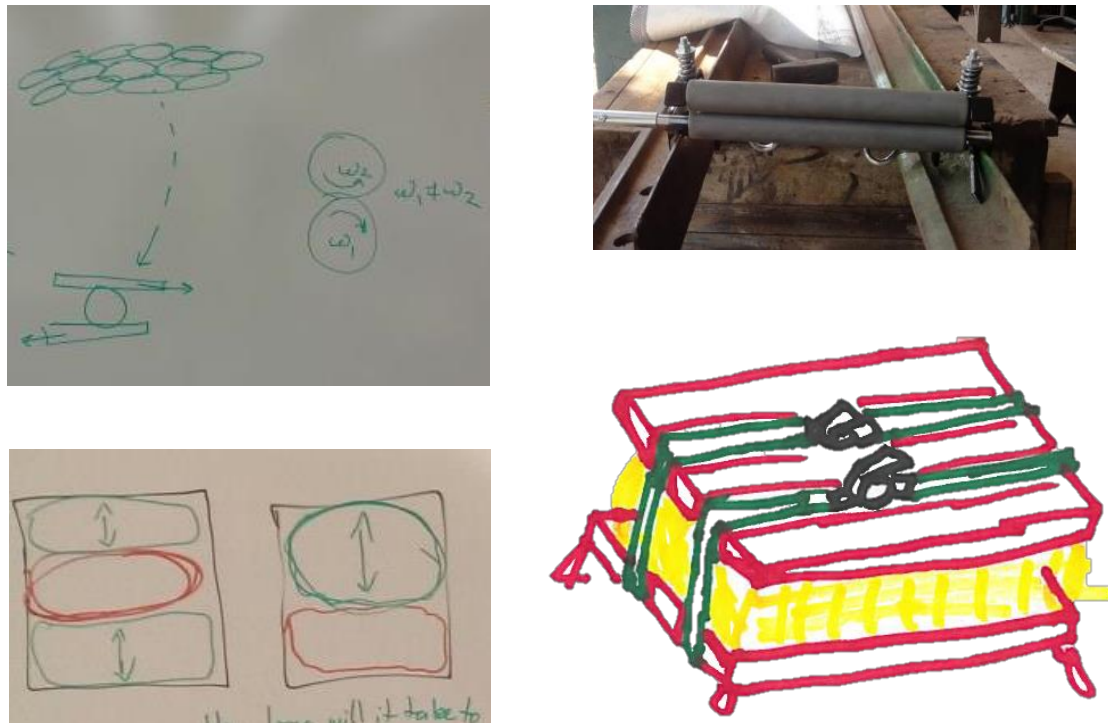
Figure B. Clockwise from top left – shearing, rollers, ratchet strap, inner tube
